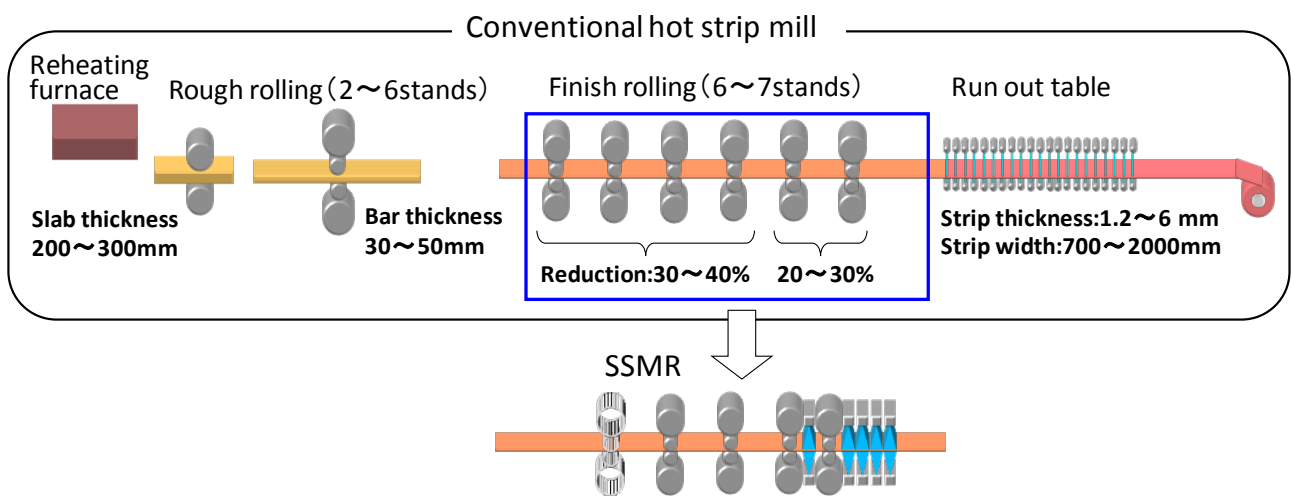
Displacement of finishing train of conventional hot strip mill to SSMR equipment
